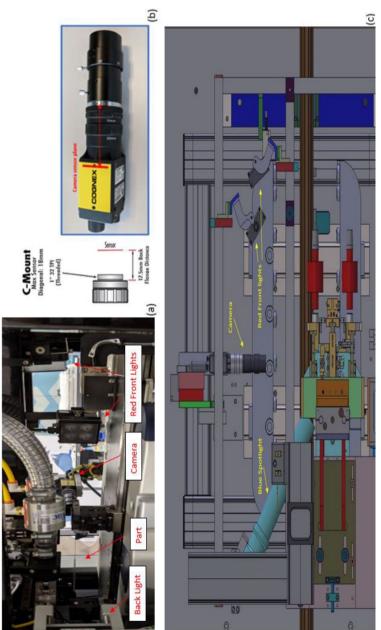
a Test cell. b Camera and lens assembly. c Cell design layout
